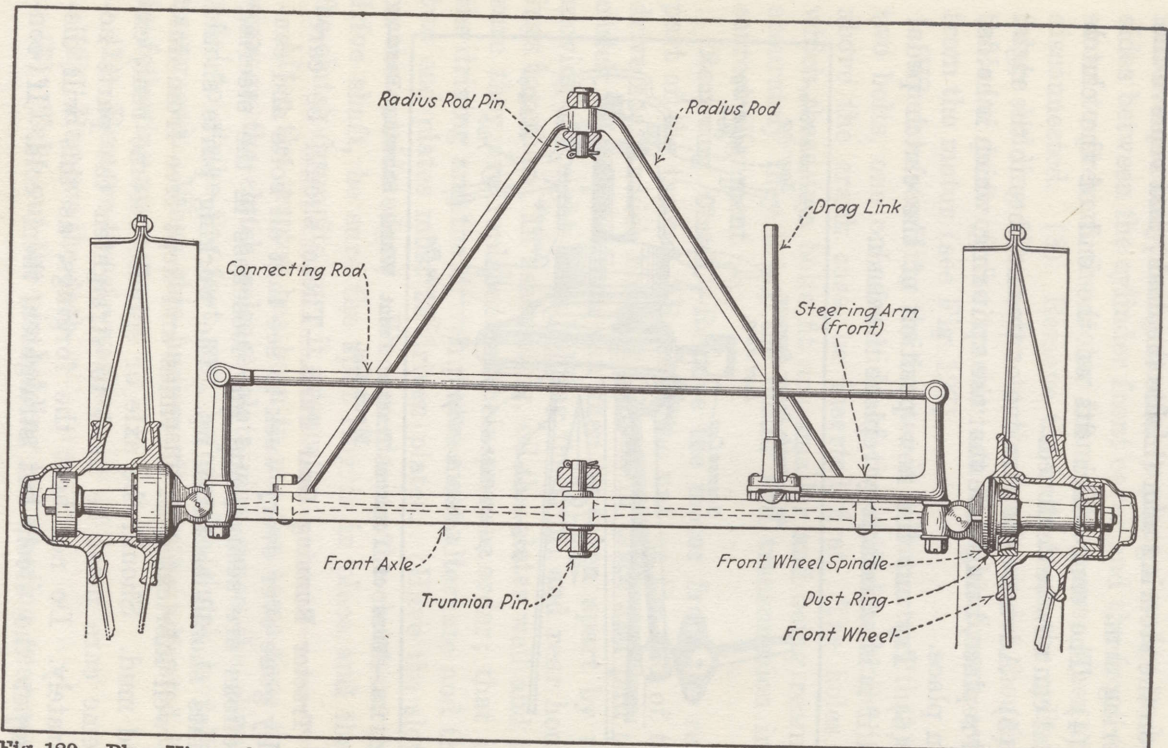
Plan View of the Front Axle of the Fordson Tractor, Showing Radius Rod, Steering Connections and Front Wheel Construction.
